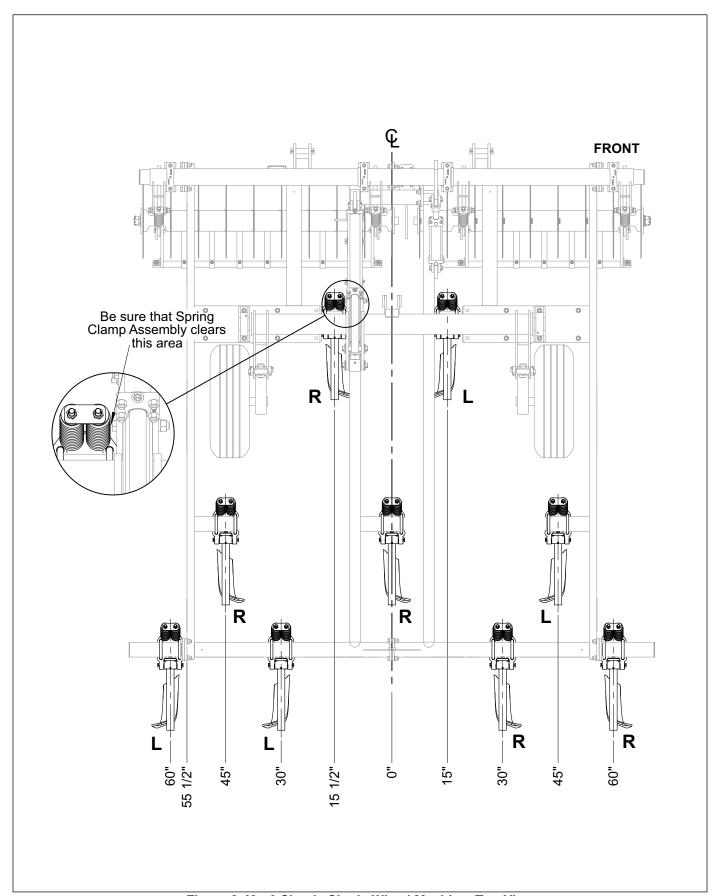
9 Shank, Single Wheel Machine, Top View
